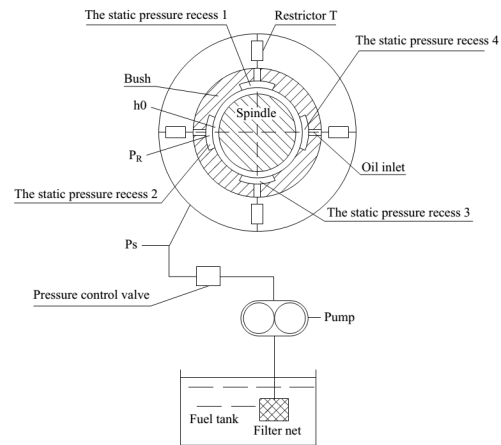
The structure of a constant pressure oil supply hydrostatic bearing on machine tools [3]
